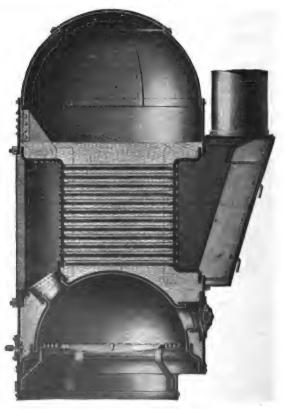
SECTIONAL VIEW OF COCHRAN BOILER.
